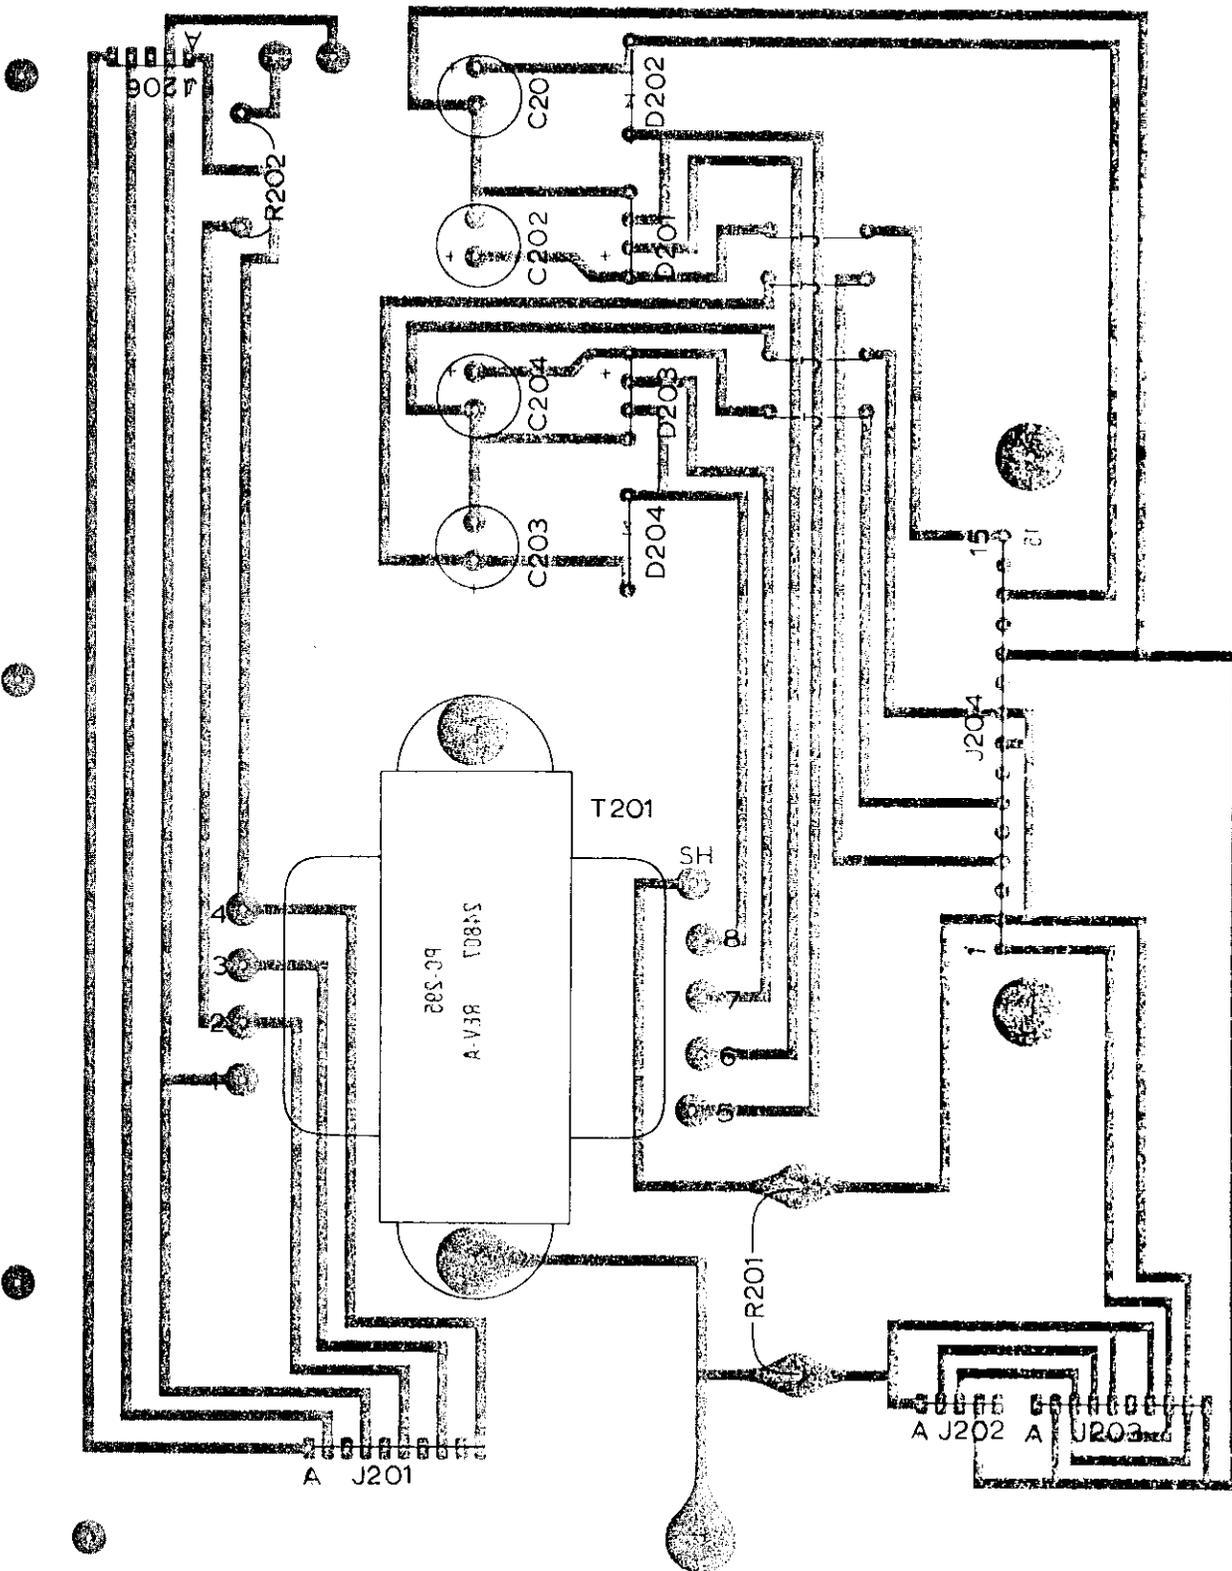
Component Layout, PC-295 (Model 1031A Power Supply)
